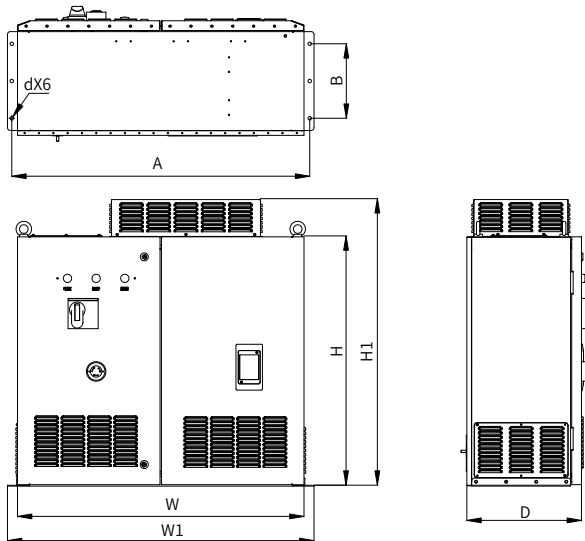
Appearance and dimensions of the CA300C AC drive cabinet (75–160 kW)
